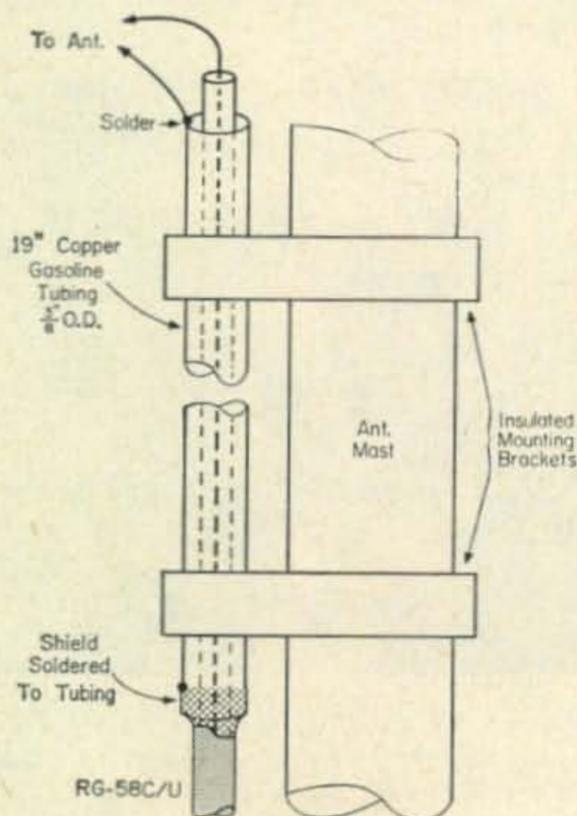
Construction of the feeding section, showing mounting brackets in place.
